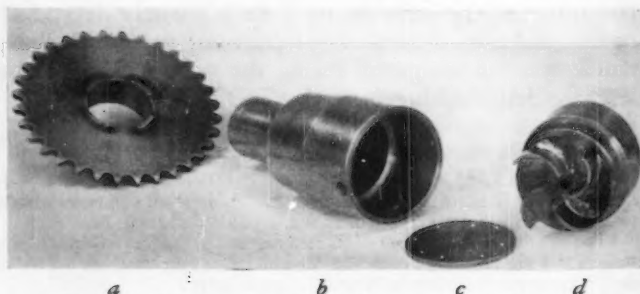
Disassembled Distributor of Abrasive Grit.
